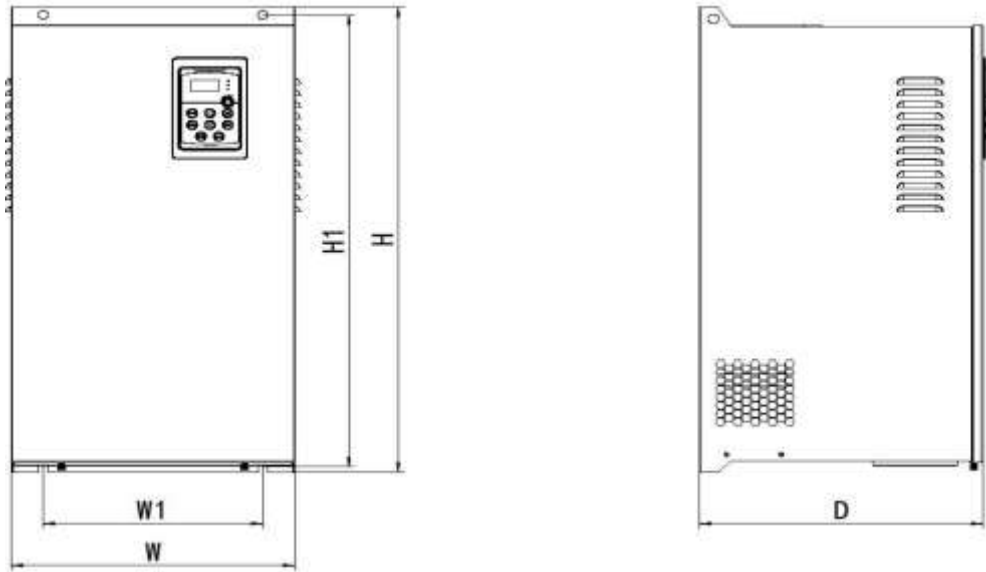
External and mounting dimensions (three-phase 22kW to 355kW)
